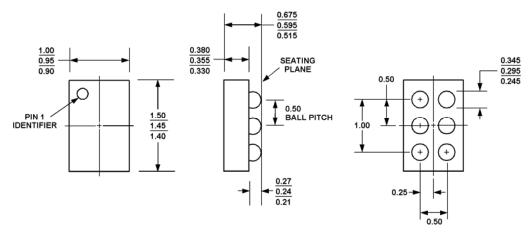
6-Lead Wafer-level Chip Scale Package Dimensions shown in mm
